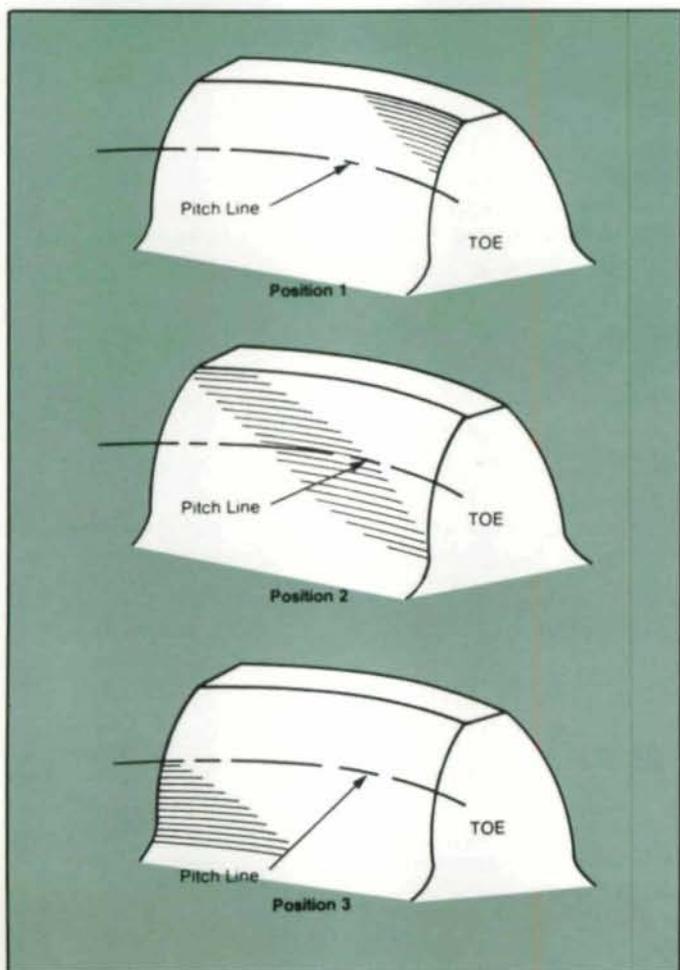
Area of Contact of Gear Tooth Surface with Conical Wheel Surface.
